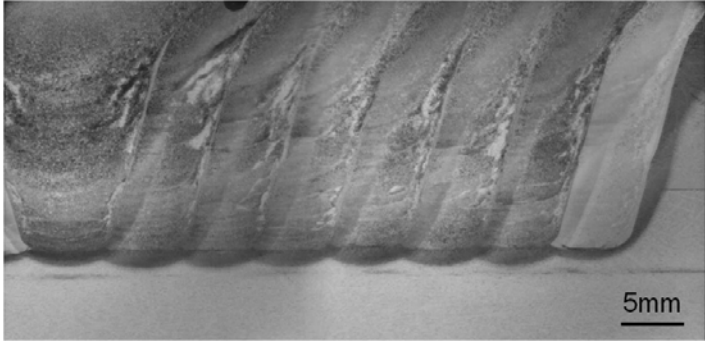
Macrograph of an FStitch weld conceived for the repair of large diameter pipelines [111].
